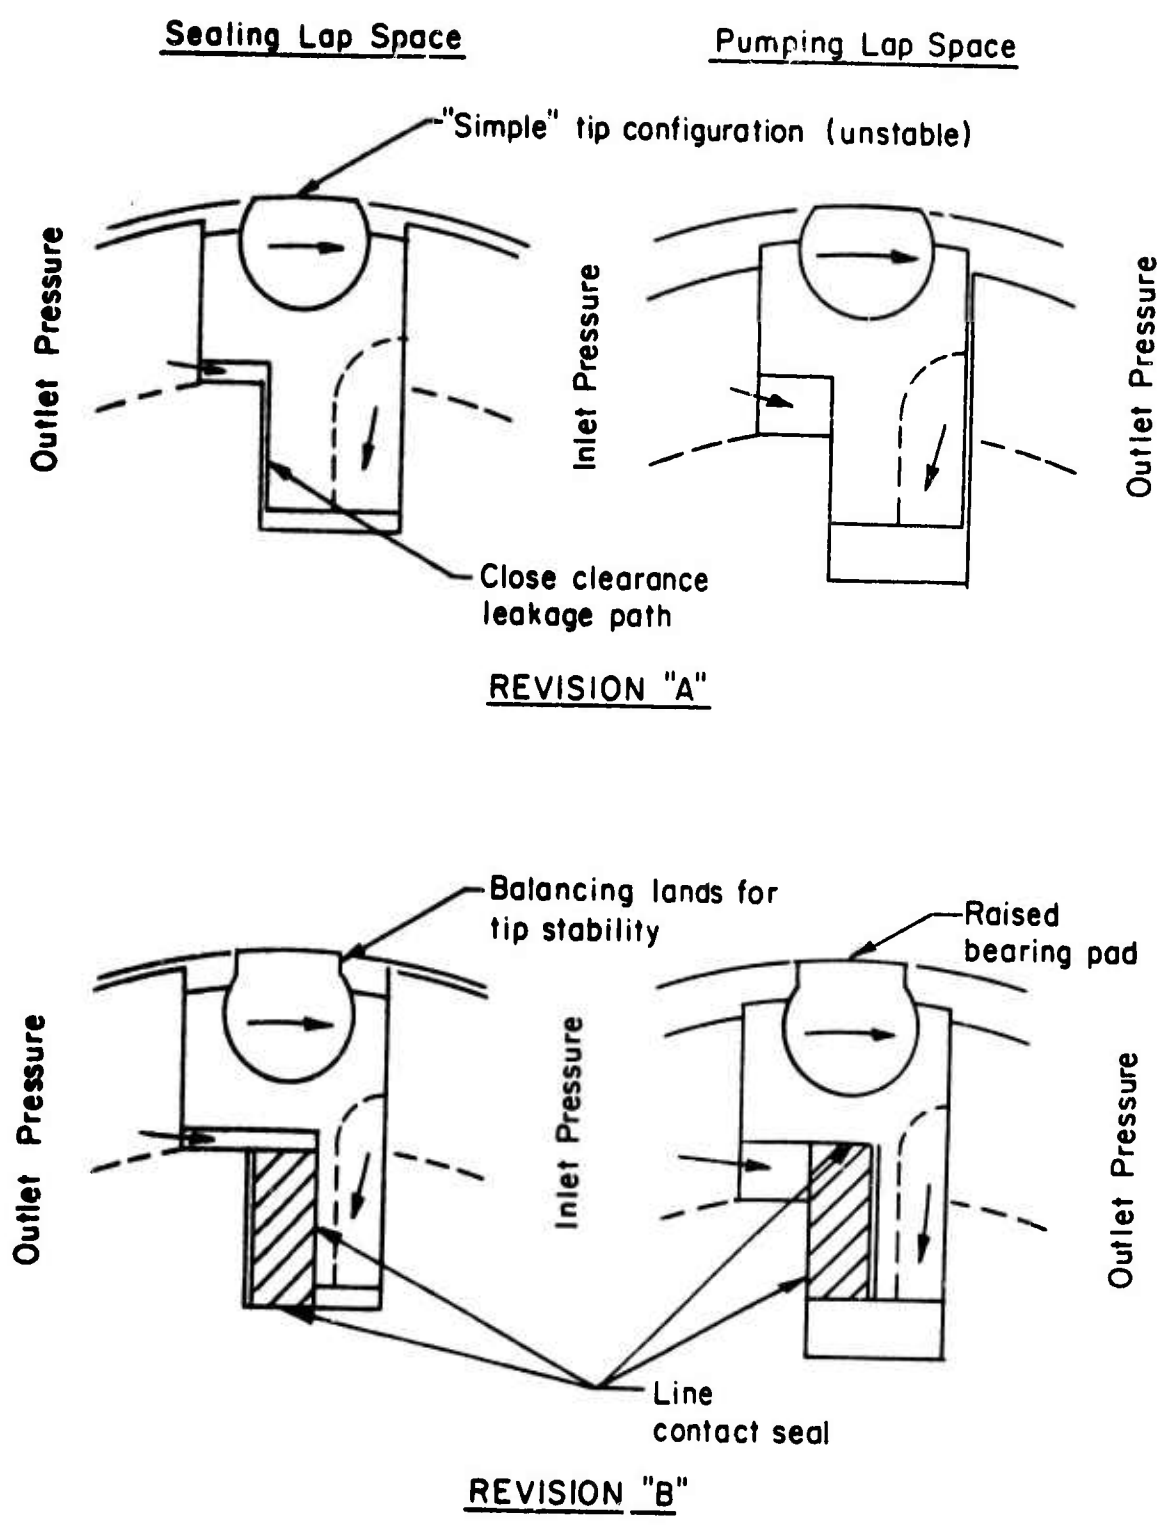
Revisions "A" and "B" Vane Assembly Designs.
